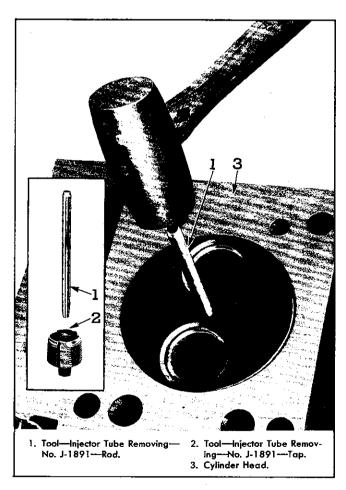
Removing Injector Copper Tube from Cylinder Head with Tool J-1891 (Operation 2).
